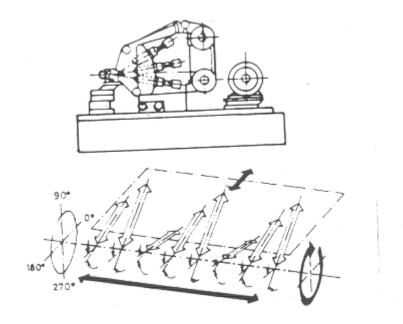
Multi Station Vertical Grinding Machine's Schematic Layout. (Star Axis Configuration)
